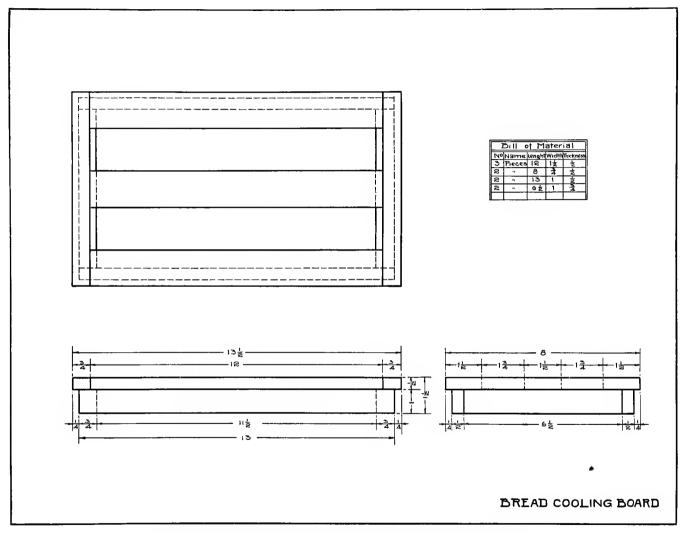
Working Drawing of Bread Cooling Board (Sixth Grade)
